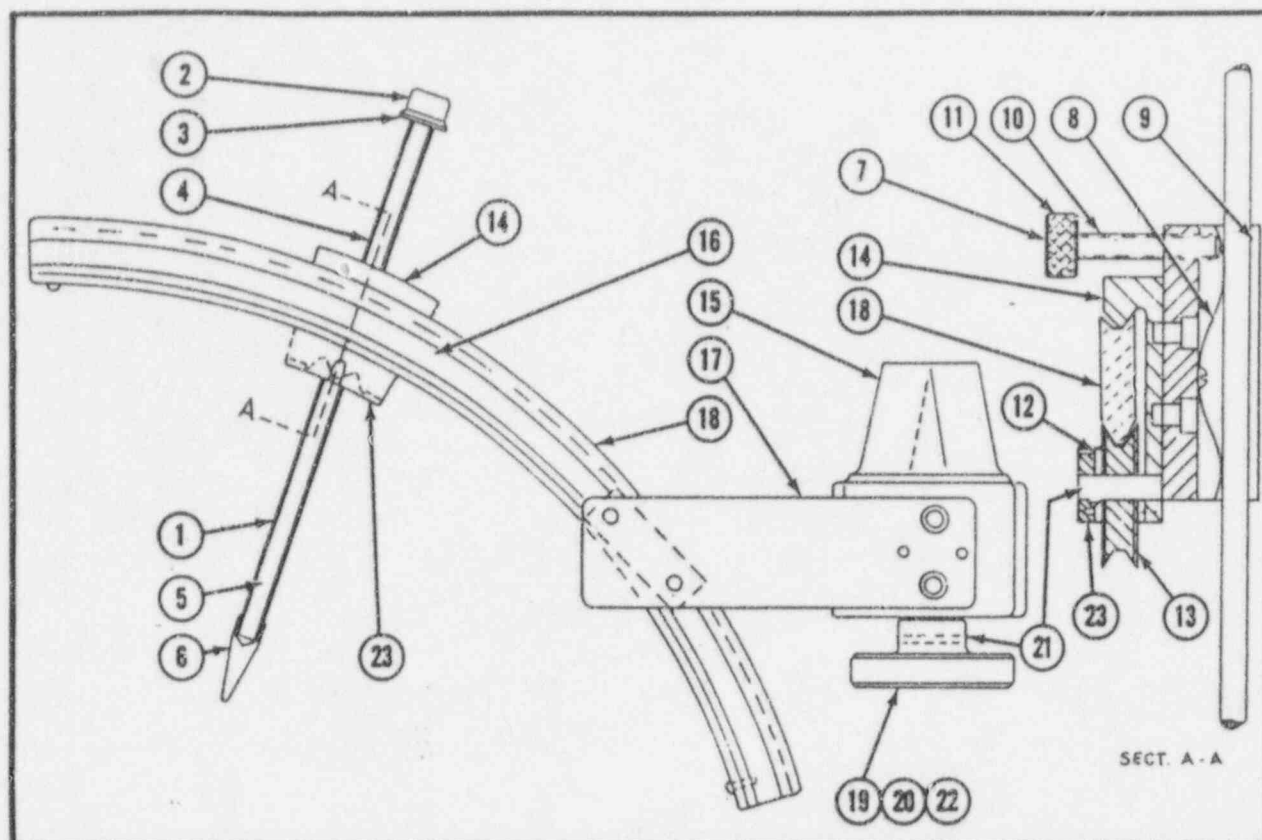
COBALT, BEAM DIRECTING PIN-AND-ARC ASSEMBLY
